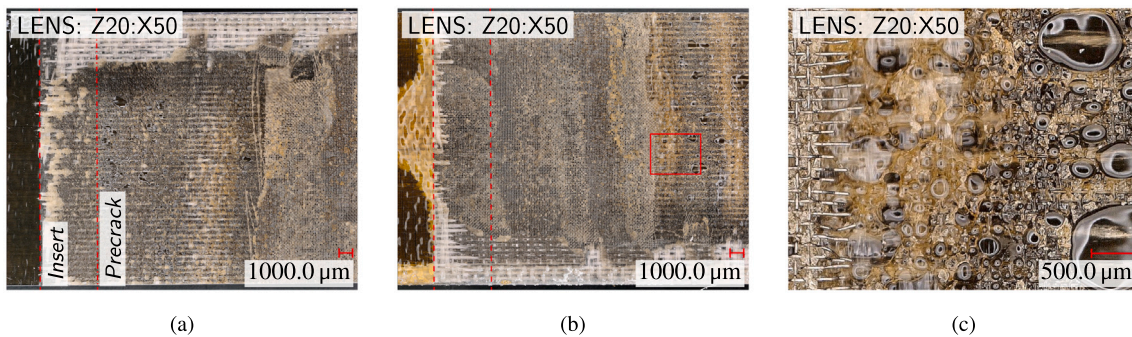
Optical microscopy of the fracture surfaces of sample 1 (example of a high-performance weld). The insert crack front and precracked crack front post initial loading are shown in (a) and (b). A magnified view is shown in (c).
